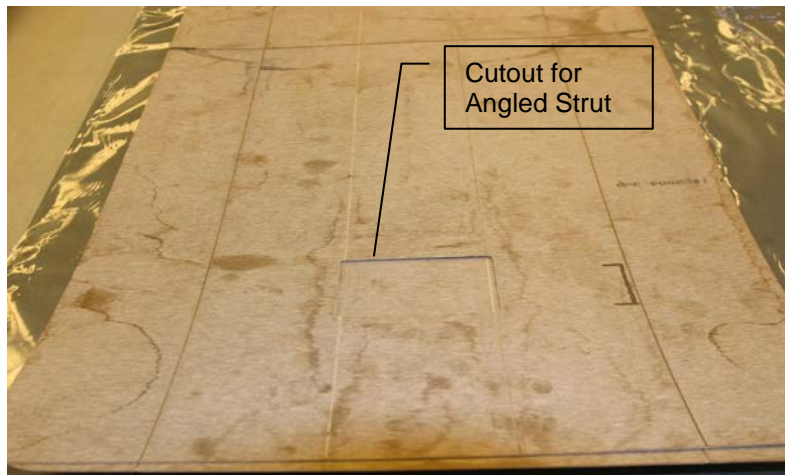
Examples of Grooves Machined into the Backside of the Melamine Sheets (note: the sheet for the bottom surface of the table is shown)
